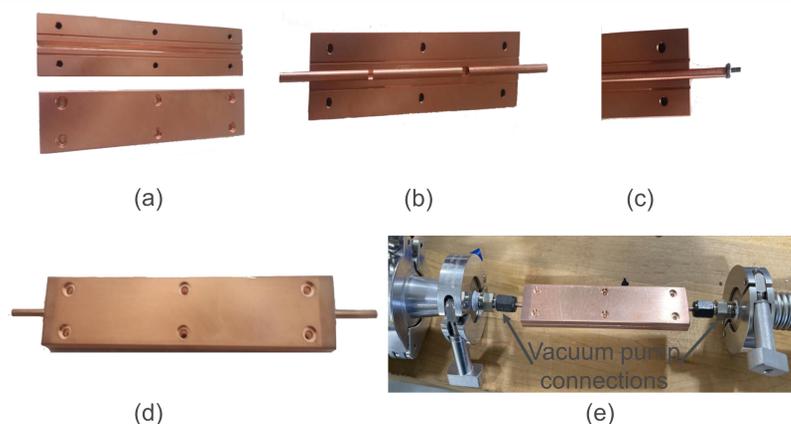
Fabrication process for a mock-up vacuum chamber. (a) Preparation of two halves before brazing, (b) three 50-mm tubes assembled in the channel, (c) assembled vacuum chamber with titanium rod inserted for clamping via application of spring force, (d) brazed chamber without machining operation, and (e) vacuum chamber on testing rig attached with vacuum pumps.
